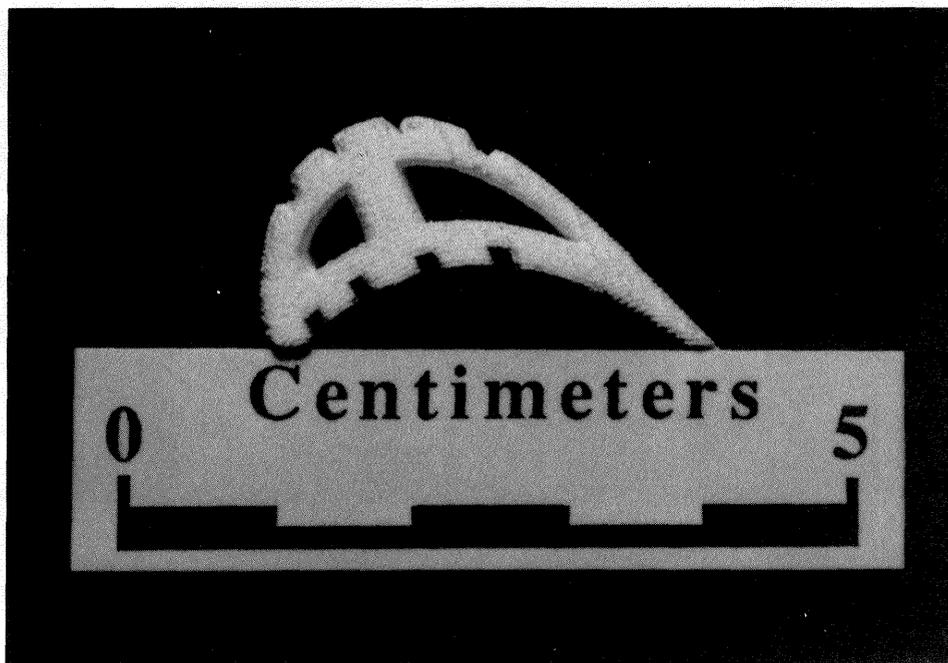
Turbine Blade Fabricated by 3D Printing, End View
